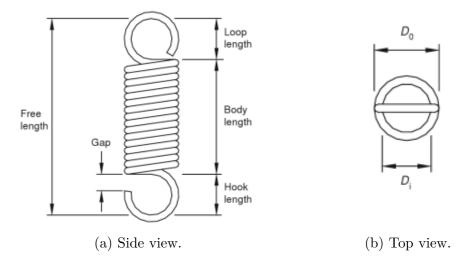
Principal dimensions for a helical extension spring with hook and loop end configurations (Childs, 2003:239).
